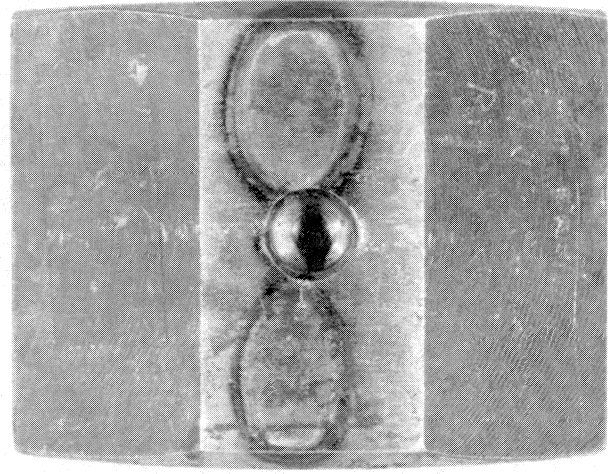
Welding Spots on a Radial Tilt Pad Bearing.
